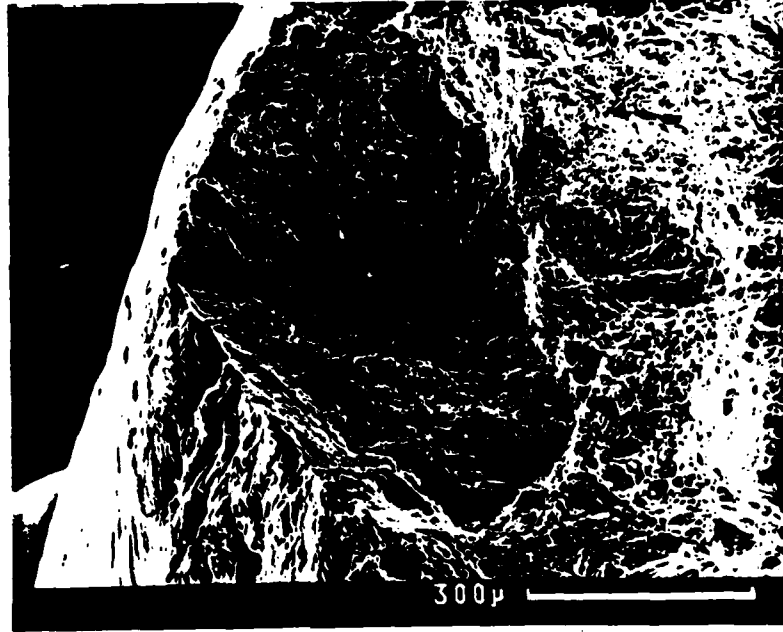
Tearing Topography Surface facet shown near edge of charged tensile specimen fracture surface
